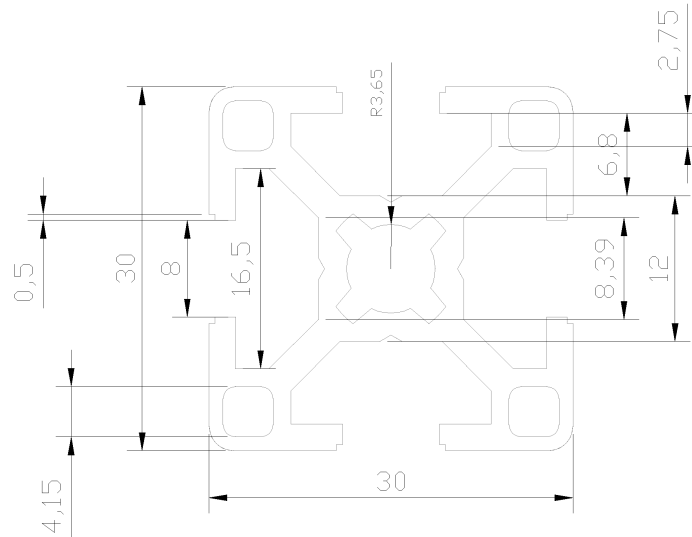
Horizontal section of the anodized aluminum profile used to assemble the apparatus chassis. Dimension are in millimeters.
